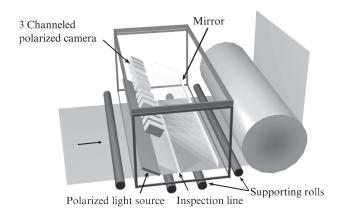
Surface inspection system using 3 cannneled polarized light
